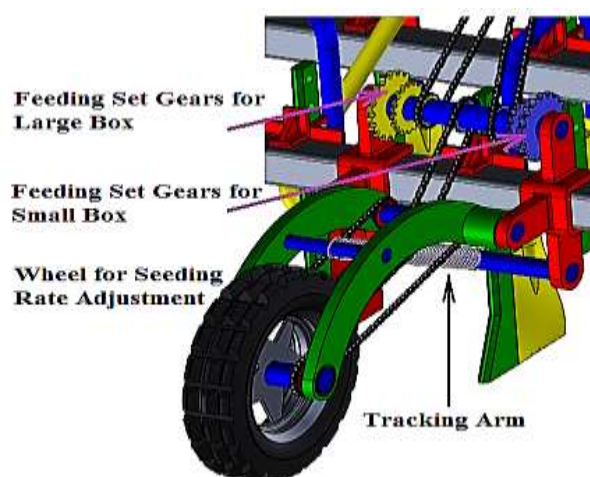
A 3D schematic drawing of the set of gears and driving wheel.
